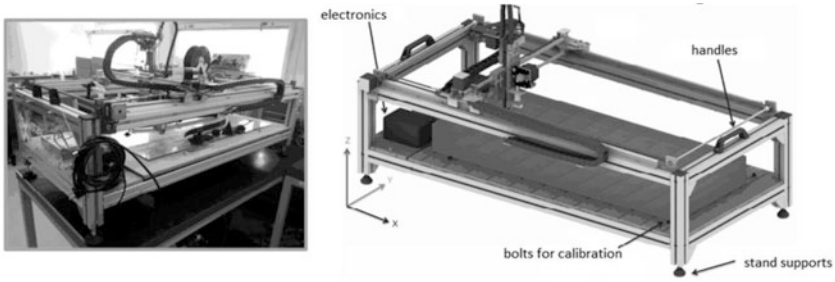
Mechanical design of testing device, draft on the *right*, real on the *left
